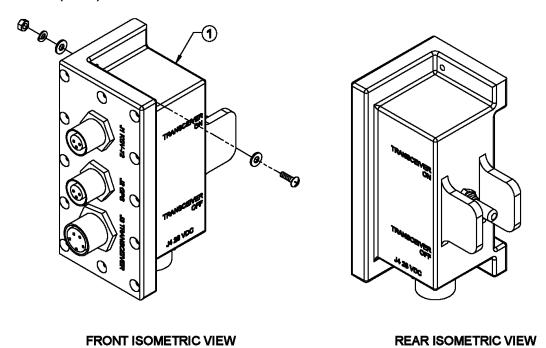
Blue Force Tracker (BFT) Power Module Assembly.
